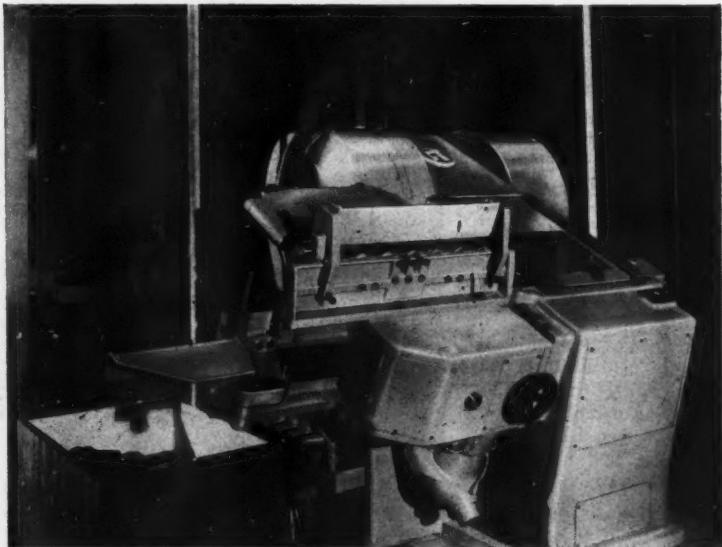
Duplex tooling is provided on this 40-ton crank press for blanking and drawing container lids at the rate of 300 per hour from specially-prepared sheets with notched edges
